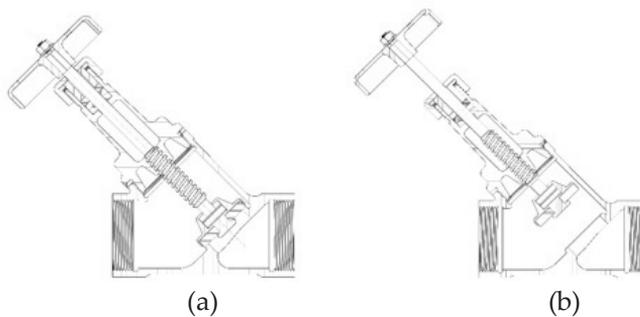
Operational states of the valve namely (a) closed valve and (b) open valve
